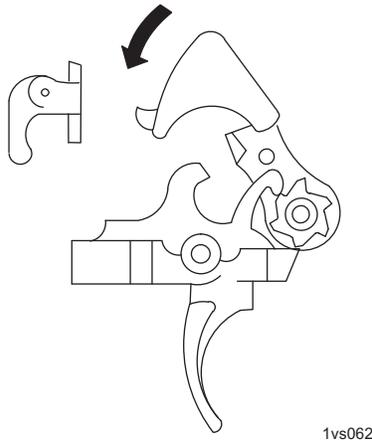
Rearward Movement of Key and Bolt Carrier Assembly.
